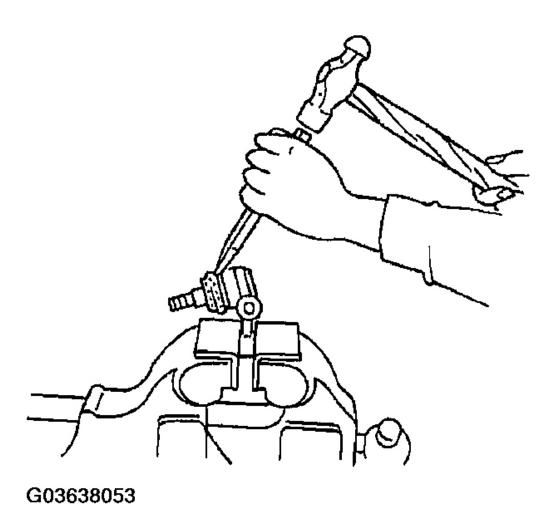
Removing Dust Boot Using A Chisel Courtesy of MAZDA MOTORS CORP.
